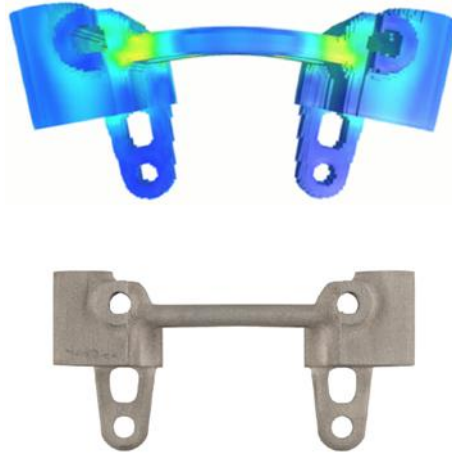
Live Sinter™ geometry printed, sintered straight¹¹¹
